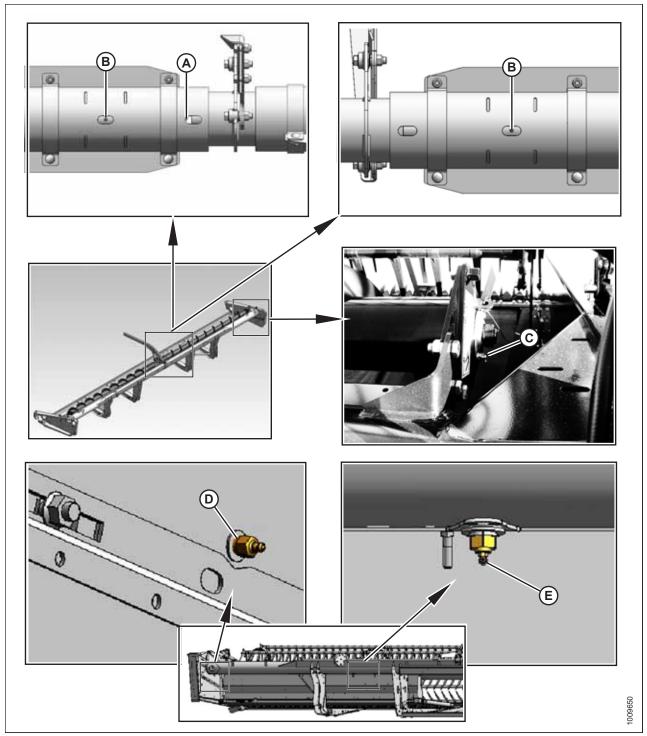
Upper Cross Auger (UCA) and Knife Drive – Double-Knife Timed Drive
